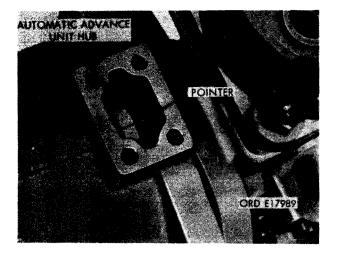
CHECKING TIMING MARK AND POINTER ALINEMENT AT FUEL INJECTION PUMP AUTO-MATIC ADVANCE UNIT HUB.
